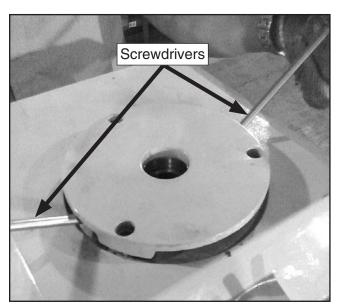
Using two flat head screwdrivers to remove spindle bearing cover.
